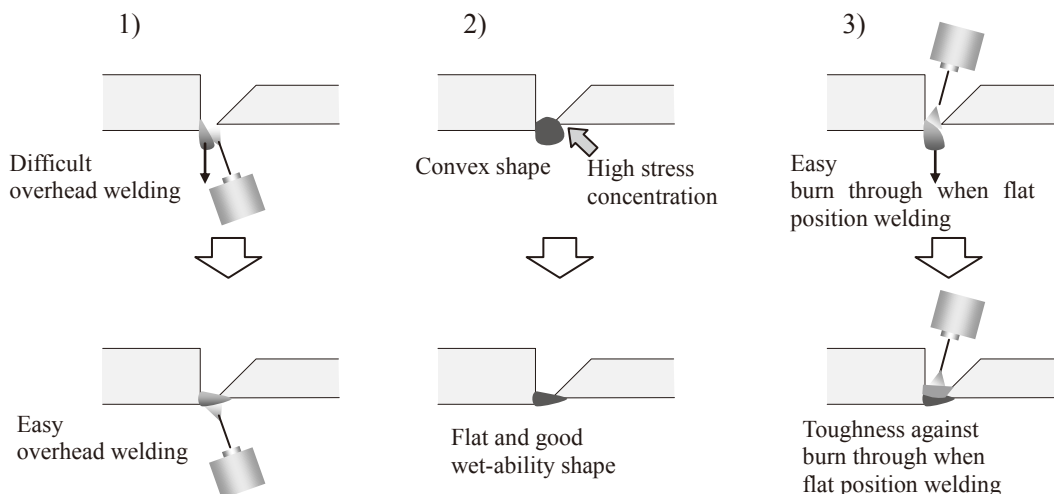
Some problems for the flat and overhead mixture welding process, and each improvement targets
